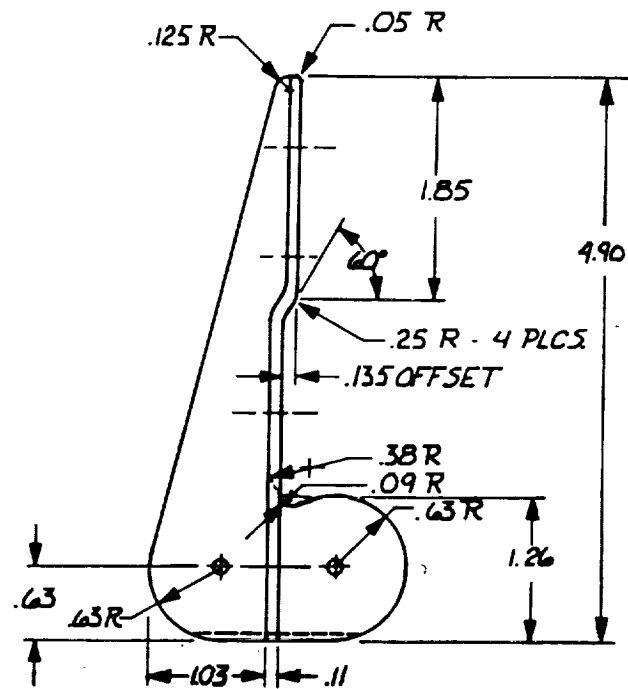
INJECTION MOLDED SHEAR CLIP
